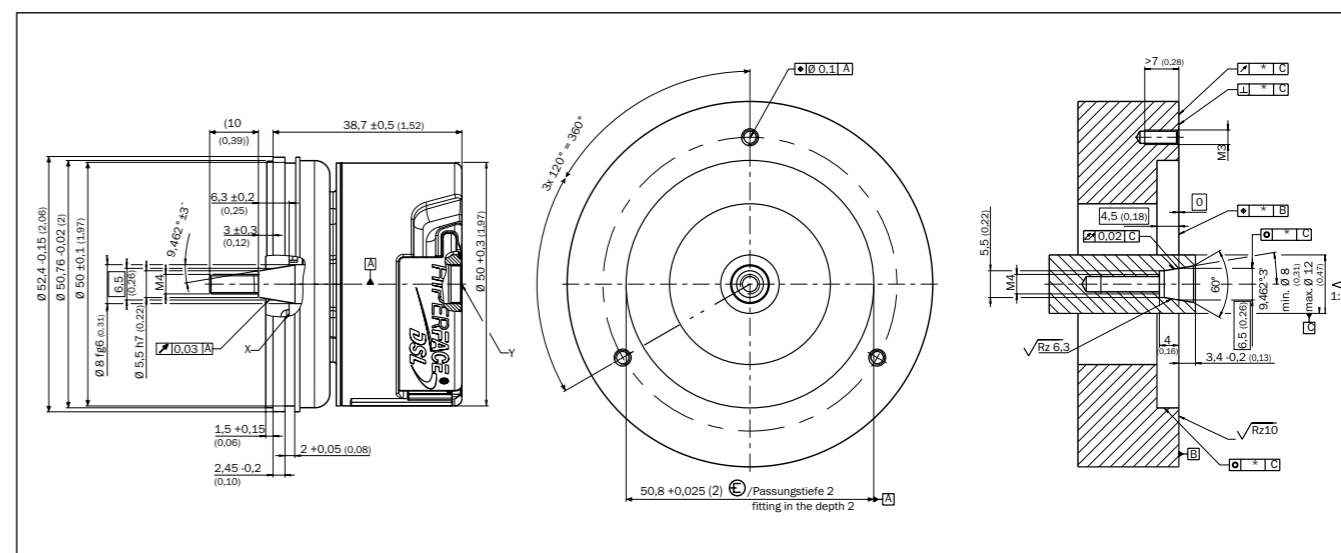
Dimensional drawing and conical shaft mounting specification with elastomer stator coupling
